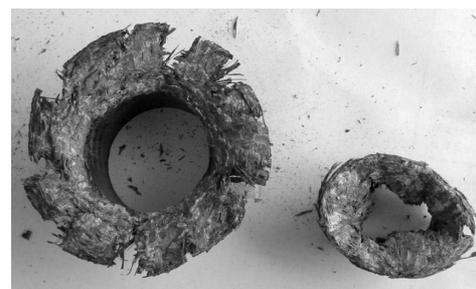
C/E tube 36.8% filled with elastomer of 90°ShA
